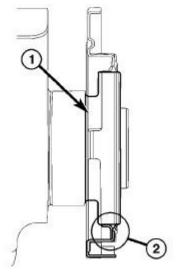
Oil Seal Retainer Assembly & Seal Protector Courtesy of CHRYSLER GROUP, LLC
